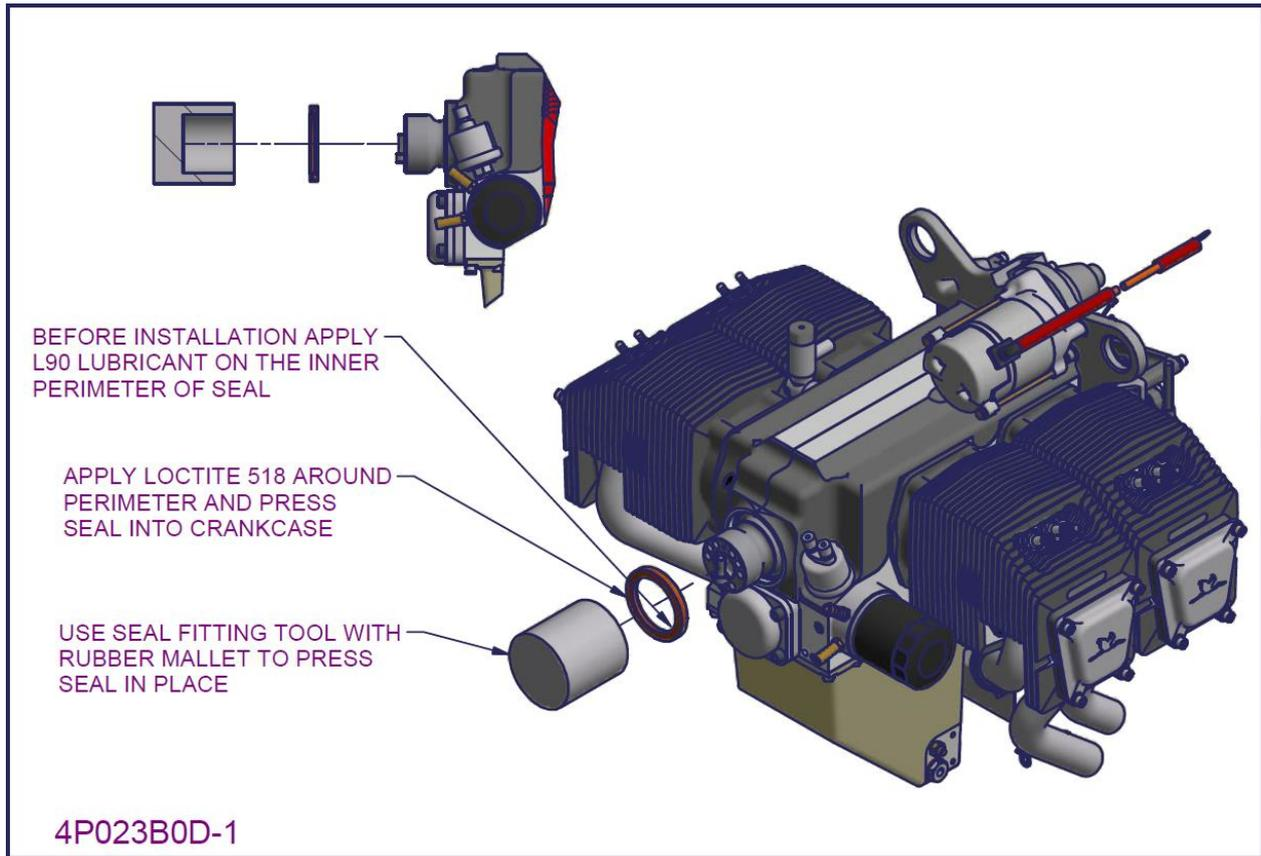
2200/3300 Front seal and propeller flange installation 2
